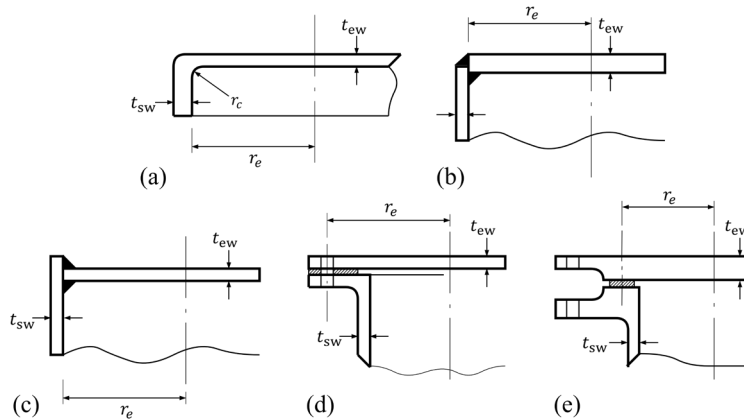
Flat ends considered in this procedure. (a) Flanged plate, (b) and (c) welded plates, and (d) and (e) bolted cover. Adapted from [68].
